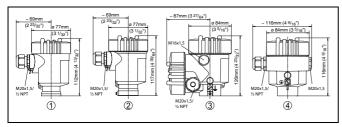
Housing versions in protection IP 66/IP 67, with integrated indicating and adjustment module the housing is 9 mm (1/64") higher
